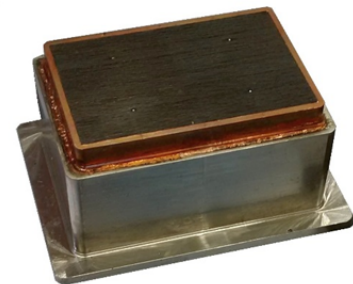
Reference sample consisting of C/C structure with surrounding galvanised copper layer and stainless steel frame.
